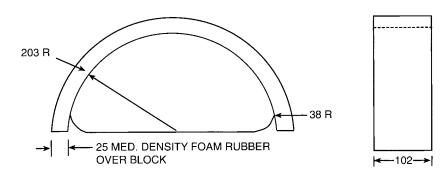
BODY BLOCK FOR COMBINATION SHOULDER AND LAP BELT ANCHORAGE All dimensions in millimeters (mm)
